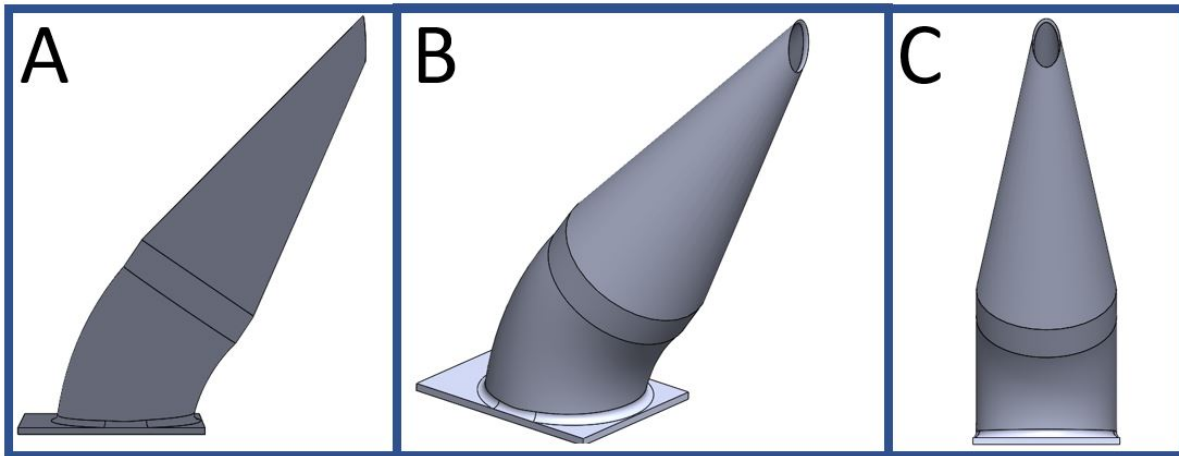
CAD drawing of tip used for nucleus removal. A) Side view of tip, B) Isometric view of tip, C) Front view of tip.
